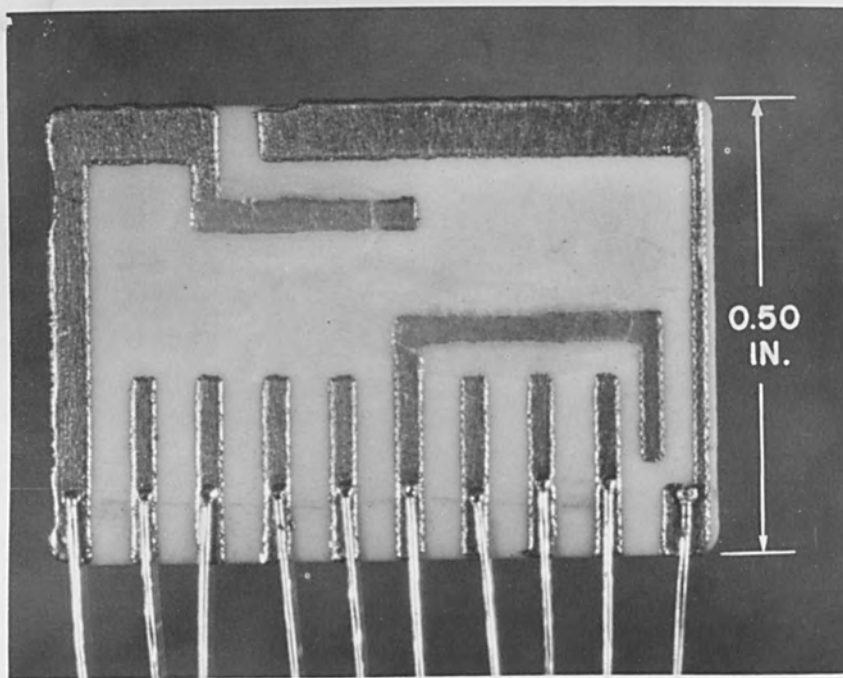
Solder Coated 0.010-in Copper Leads Welded to 0.200-in. Nickel Plate
